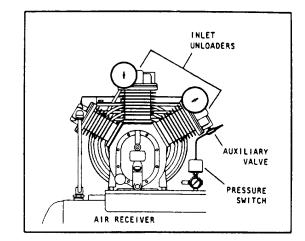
Typical Dual Control arrangement. PRESSURE SWITCH ADJUSTMENT
